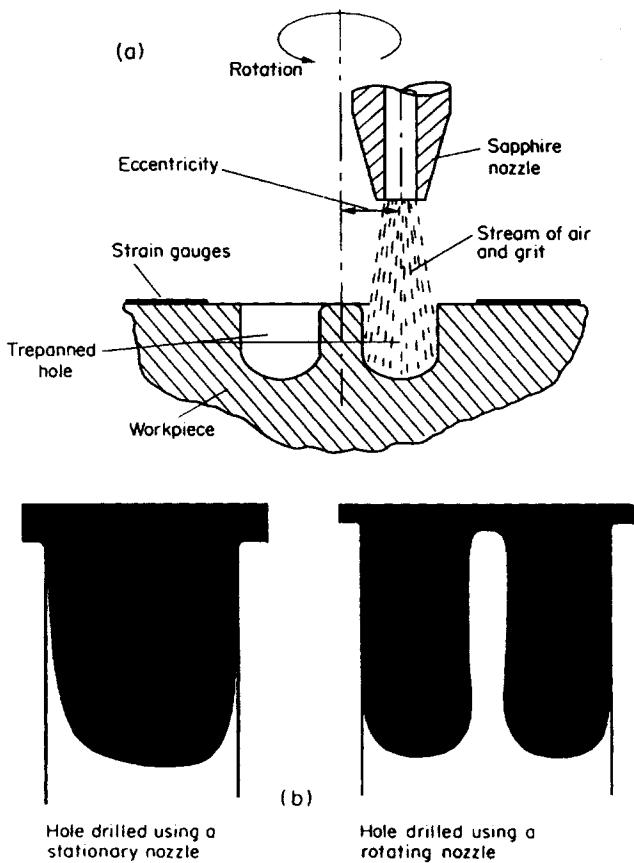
(a) Air abrasive hole machining using a rotating nozzle; (b) types of holes produced: (i) hole drilled using a stationary nozzle, (ii) hole drilled using a rotating nozzle (trepanning)
